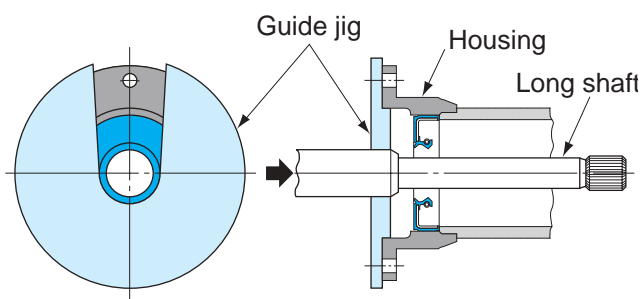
Guide jig for inserting of long shaft into seal bore
